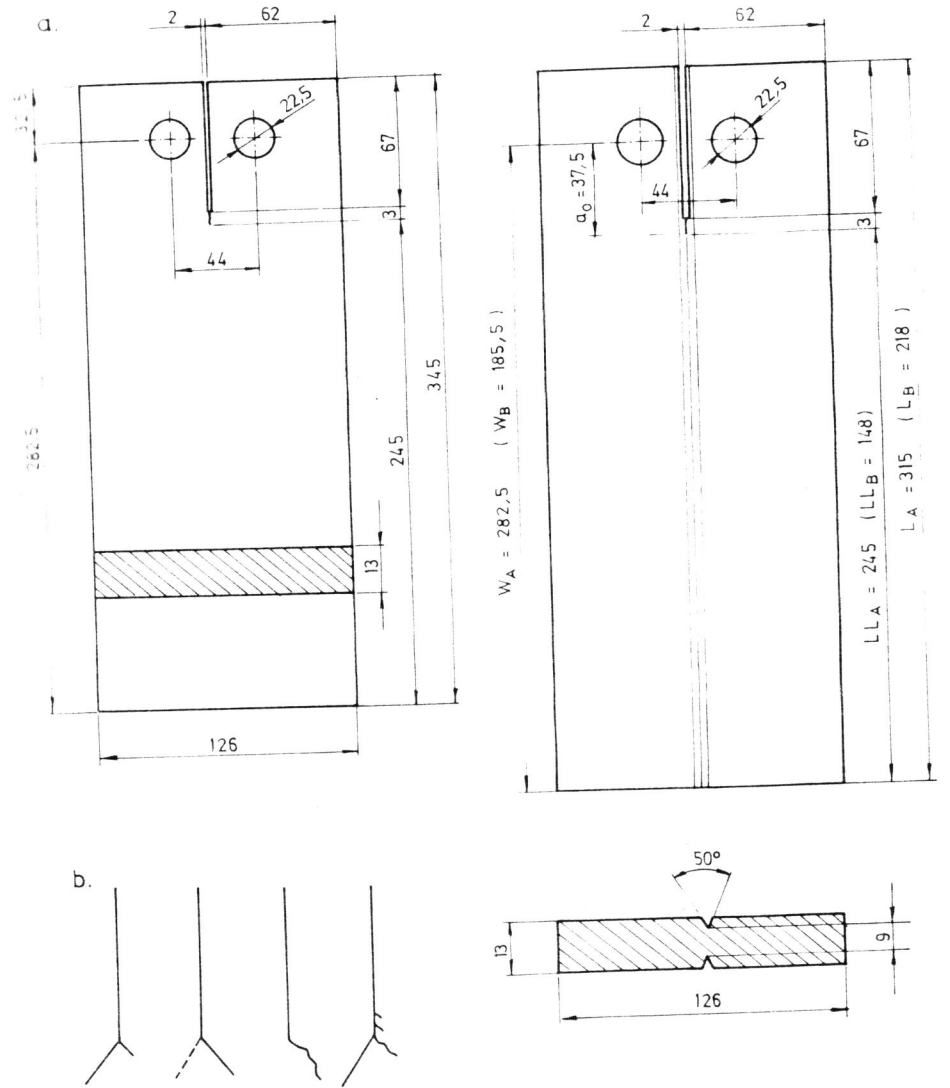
DCB fatigue precracked specimen with smooth outer surfaces
